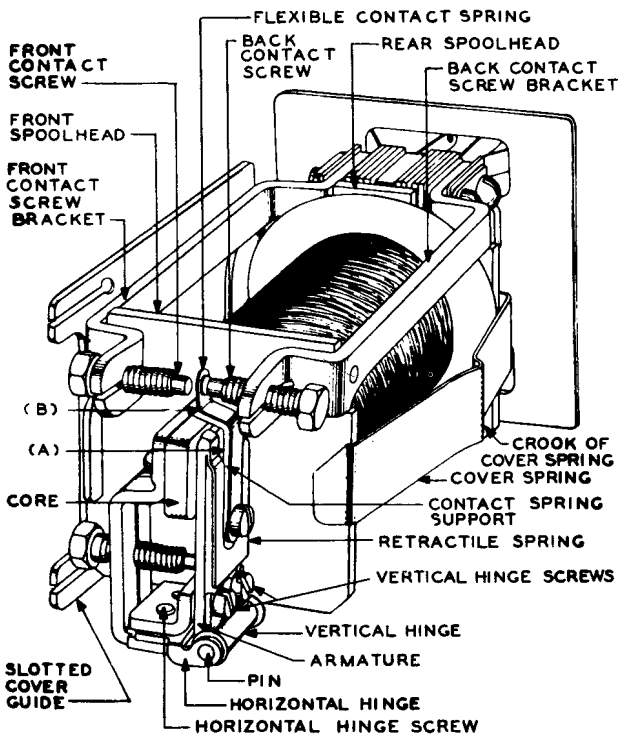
Relay Shown Equipped with Slotted Cover Guide and Cover Spring (Cover Guide and Spring Used Only on N- and S-type Relays)
